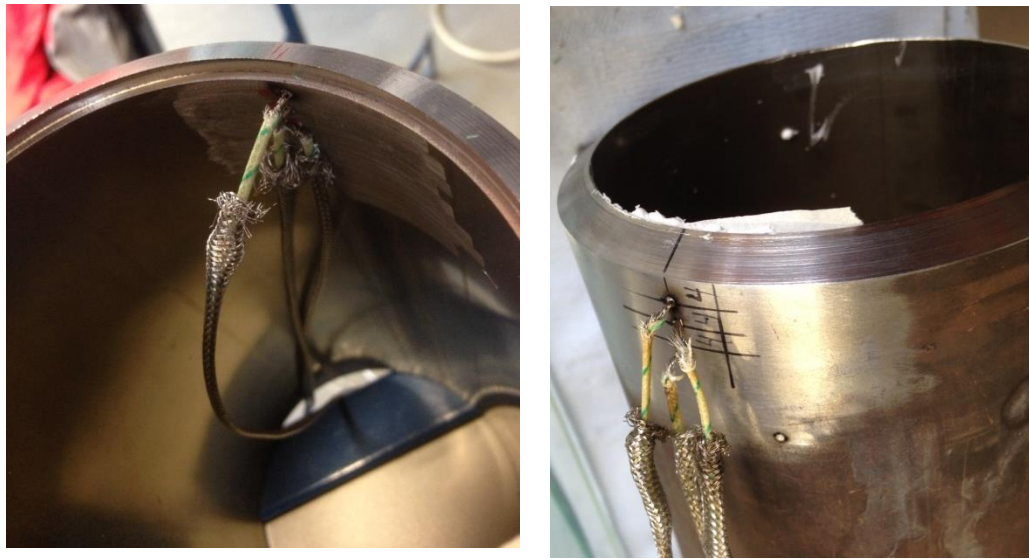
Thermocouples located on the inner and outer surfaces.
